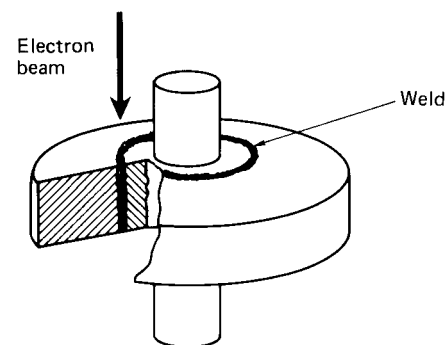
Cutaway view showing location and penetration of a circular electron beam weld joining a disk-shaped component to a shaft
